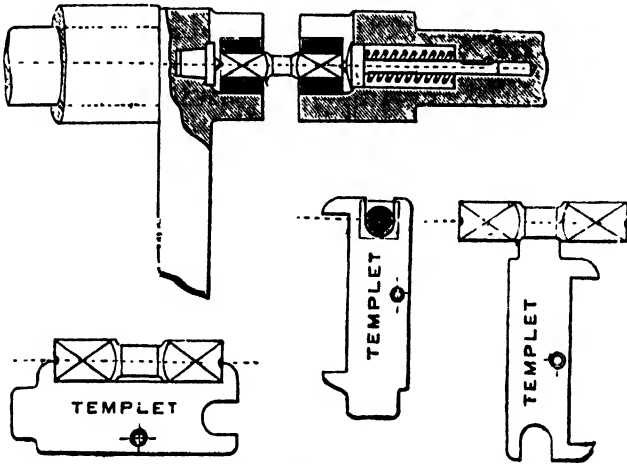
METHOD OF HOLDING SPECIMENS FOR TORSION TESTS
